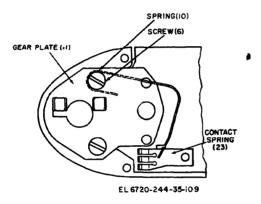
Spring location (spring (10) from fig. 3-22).
